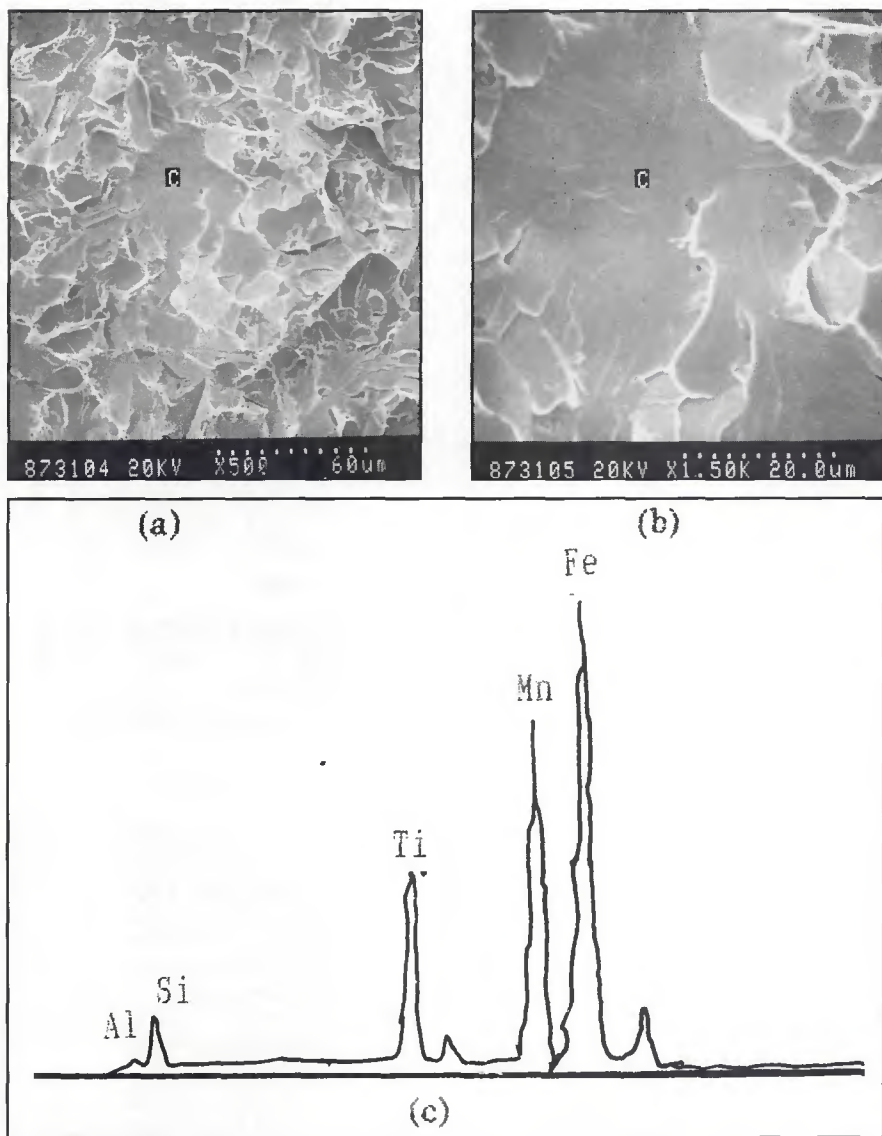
Fracture surface and microcrack origin zone of the impacted weld. A—Fracture surface, 500X; B—origin, 1500X; C—EDX analysis of C point in B.
